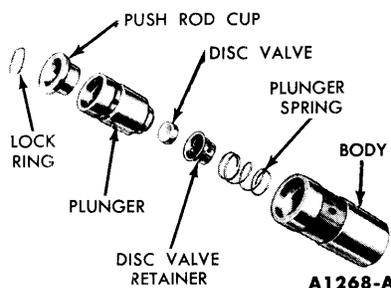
Typical Hydraulic Valve Lifter Assembly
